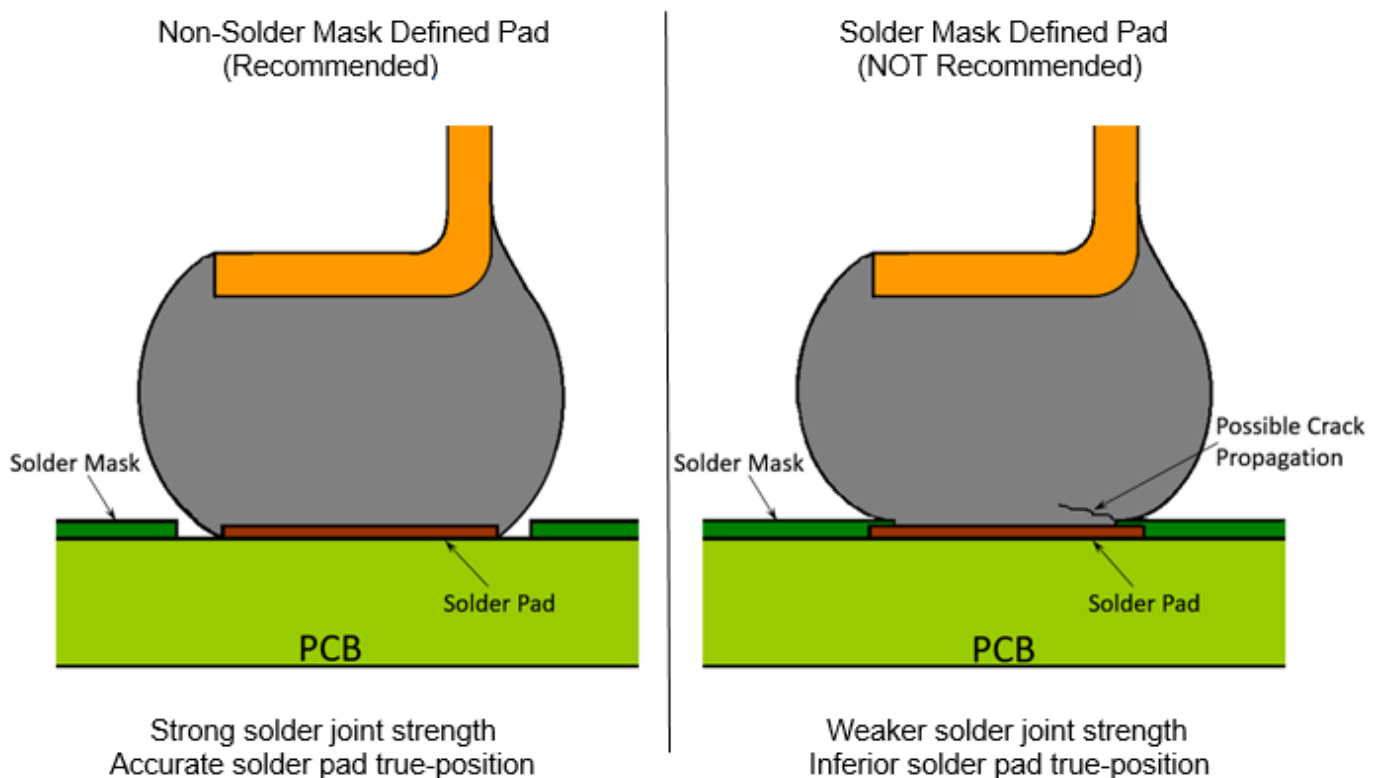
Non-Solder Mask Defined Pad and Solder Mask Defined Pad
